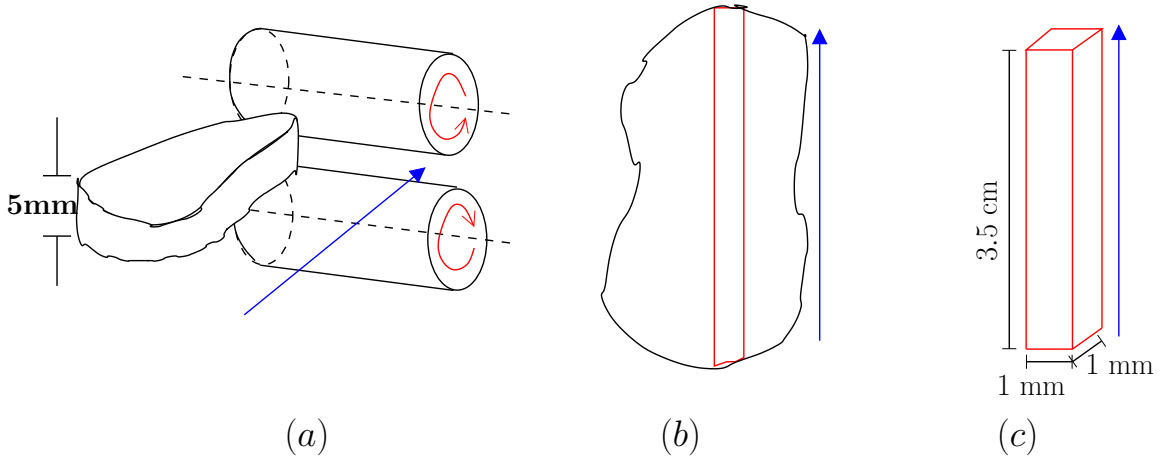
(a) Raw sample rolled in a mill; (b) Long piece cut out of the rolled sample; (c) Approximate final dimensions of the cut and ground piece. The rolling direction is shown as a blue arrow in all three images.
